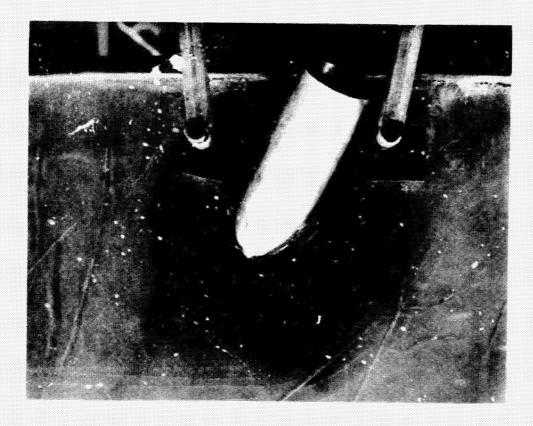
Installation of Tank Strut Seal Boot Support Tube
